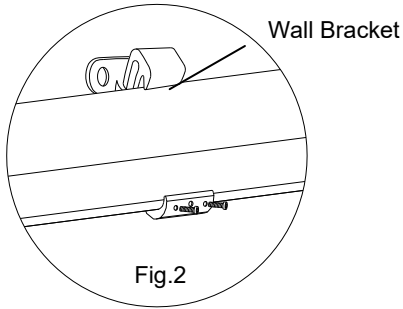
Suggest two people lift the Awning (A) to the height of wall bracket, and slide the Awning (A) into Wall bracket (B), connect Wall bracket (B) and Link part (C) on Awning (A) by Bolt (AA), each between distances is 2115mm (83.3 inches).
